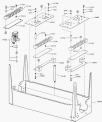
Exploded View of the Mechanical Assembly
